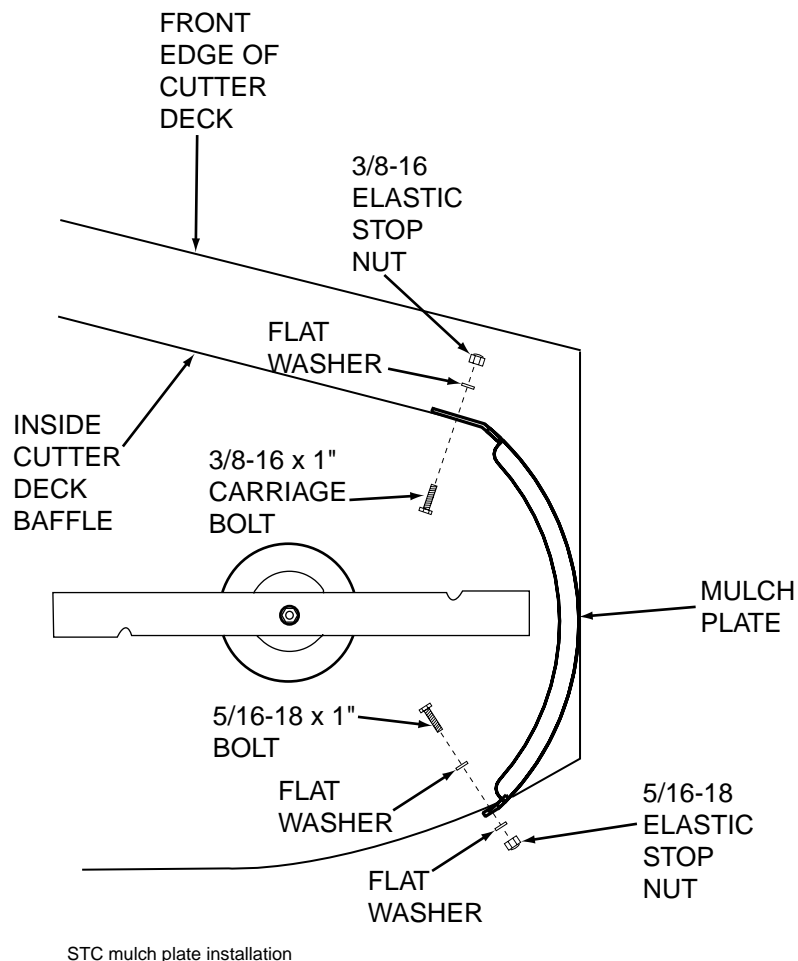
Mulching Plate Mounting for Tiger Cub Cutter Decks
